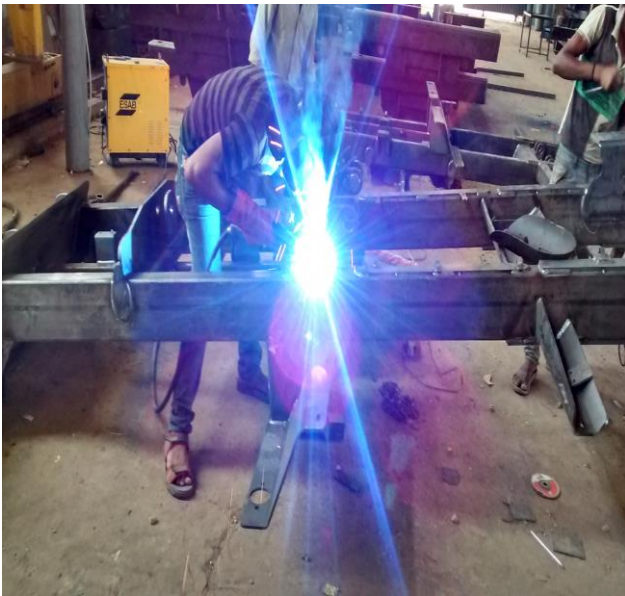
The Chassis is rotated 180 Deg. To full weld bottom components of chassis, While rotating the Chassis there is chance of damage of component..
